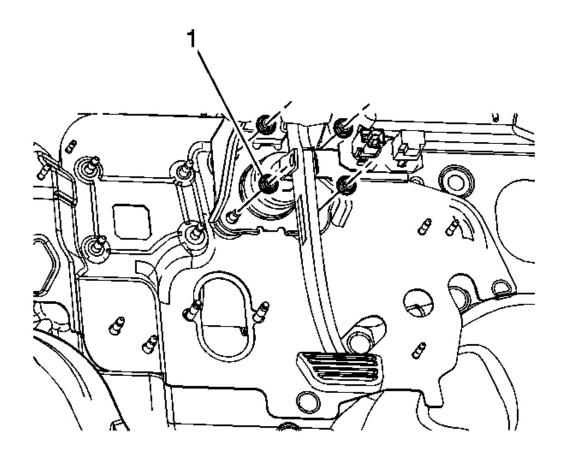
Identifying Master Cylinder Nuts Courtesy of GENERAL MOTORS CORP.
